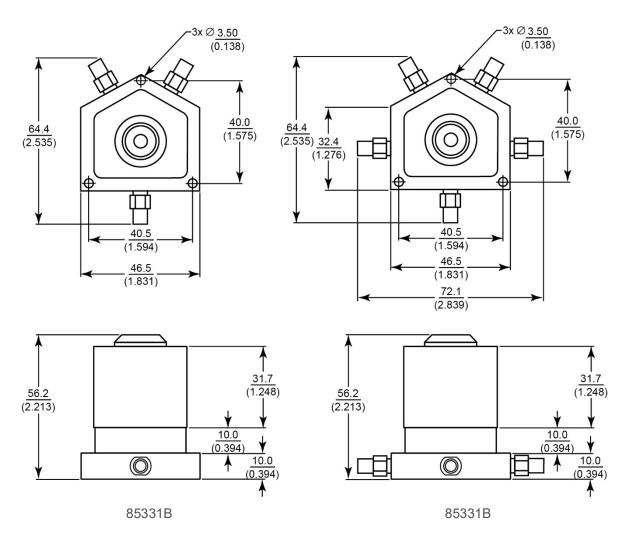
Product mechanical outline. Dimensions are in mm (inches) nominal, unless otherwise specified.
